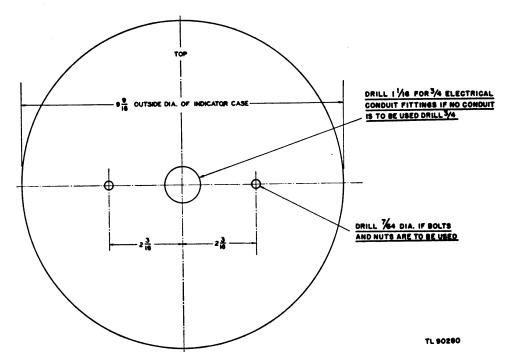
Indicator ML-117 or ML-117-B, mounting dimensions.
